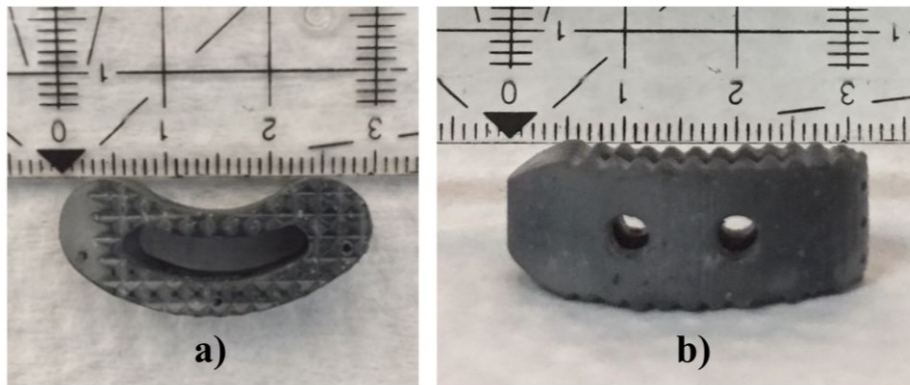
The 3D design of spine cage considering the adjustment of size and features of bone graft holes and pyramid jaws: a) top view; b) side view and perspective view
